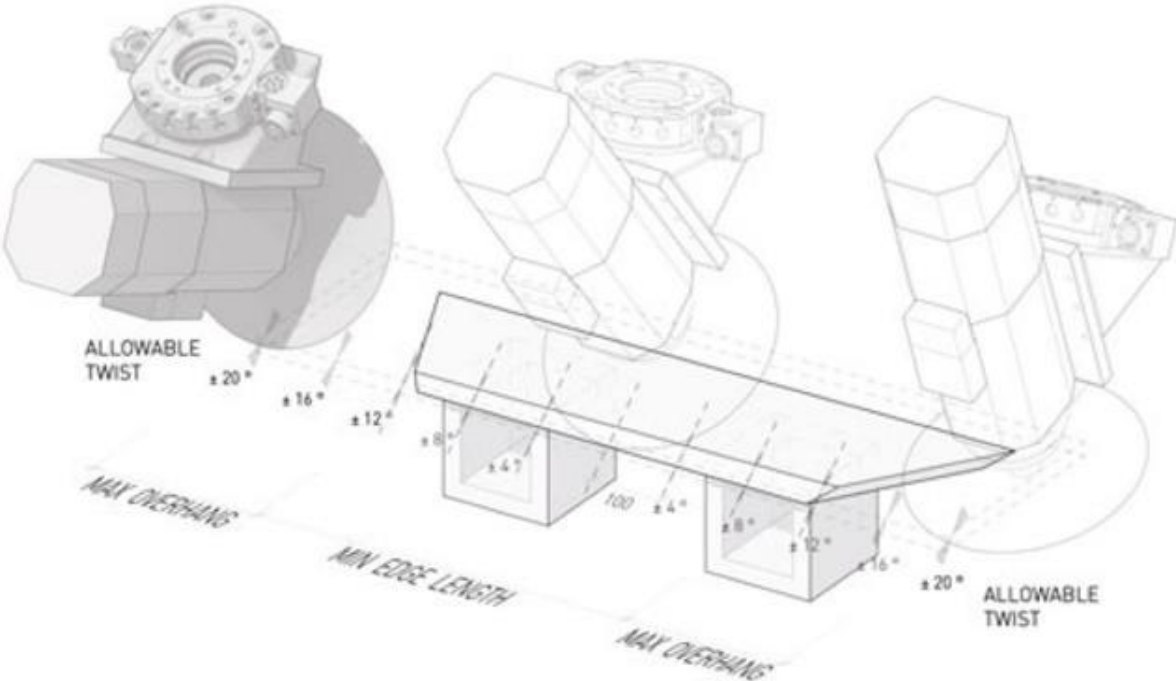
Robotic fabrication with elevated members for Utzon 40 Pavilion.
